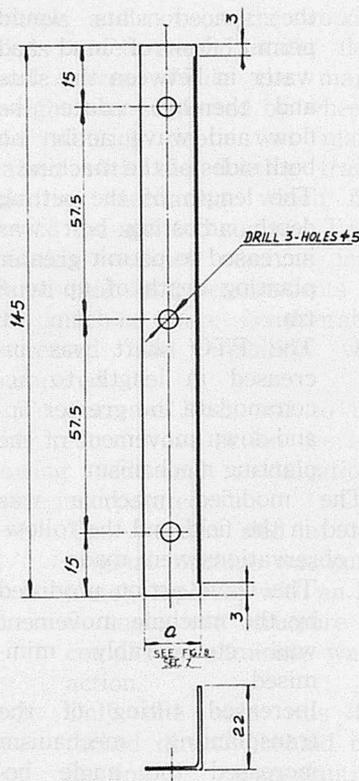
Seedling Box Wire-comb Reinforcing Plate (Quantity Req. 6, Material M.S. Sheet 20#)
